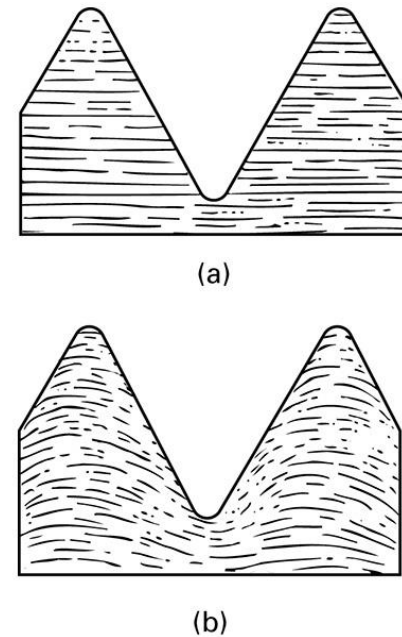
Schematic comparison of the grain flow in a machined thread (a) and a rolled thread (b). The rolling operation further deforms the axial structure produced by the previous wire- or rod-forming operations, while machining simply cuts through it.
